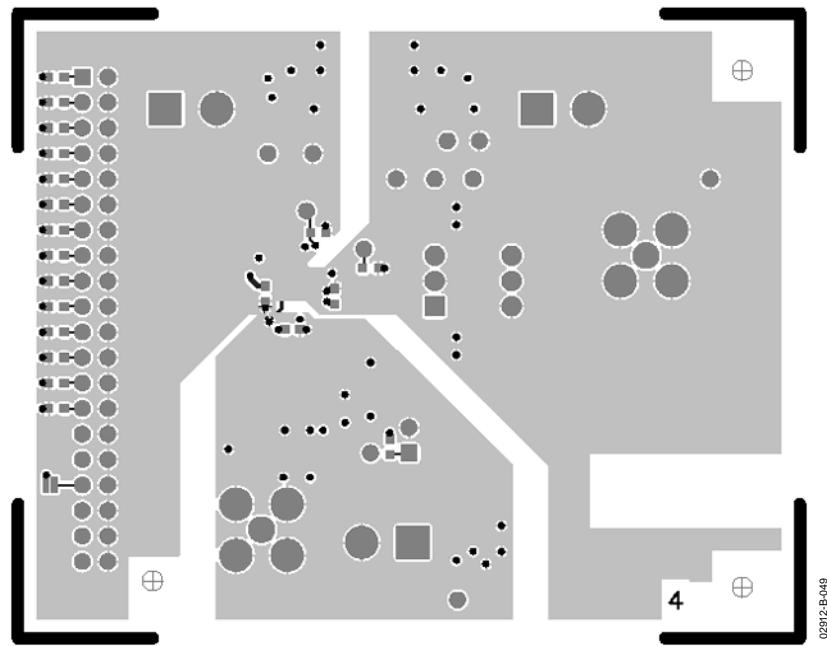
LFCSP Evaluation Board Layout—Secondary Side
